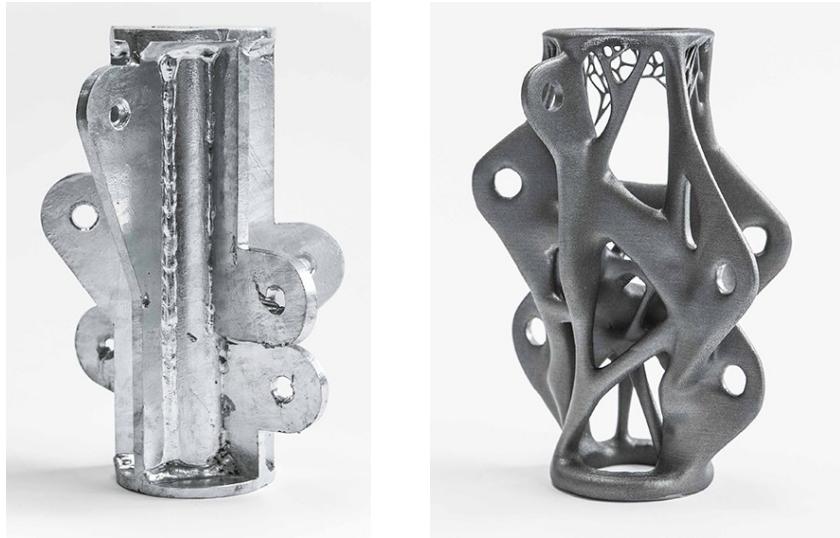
Traditional welded node design compared to the optimized and 3D printed node (Arup.com)
